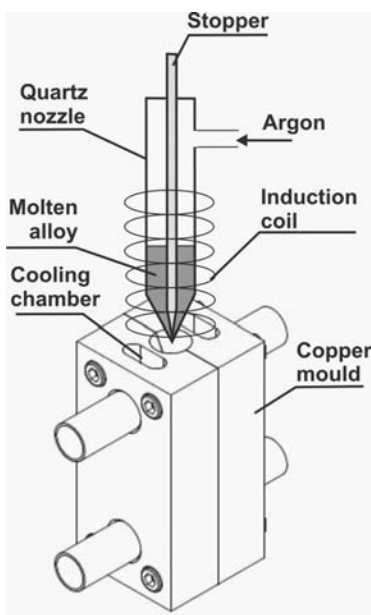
Schematic illustration of the pressure die casting equipment used for casting bulk amorphous samples
